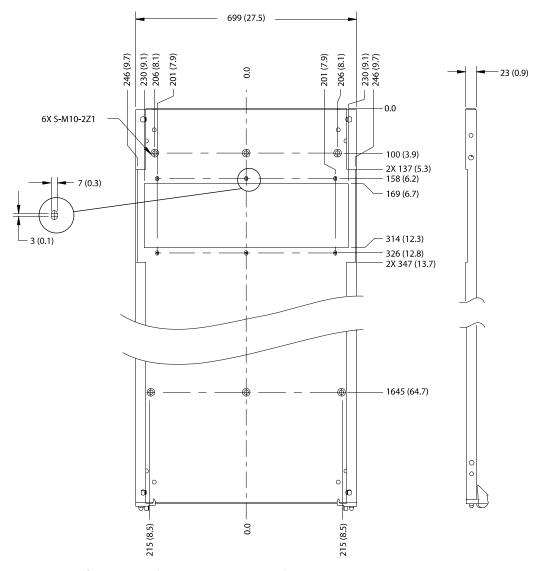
Vent Dimensions for Mounting Plate in 800 mm (32 in) Enclosure
